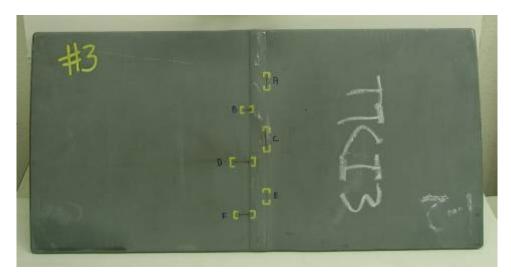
Tank Car Butt Weld Master Gage with EDM Notches at Weld Toe
